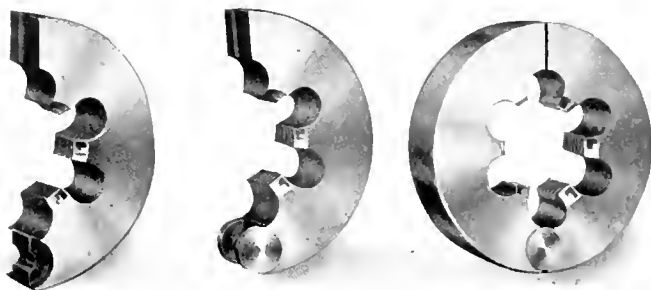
The Remington Tool and Machine Co's Adjustable Threading Die
